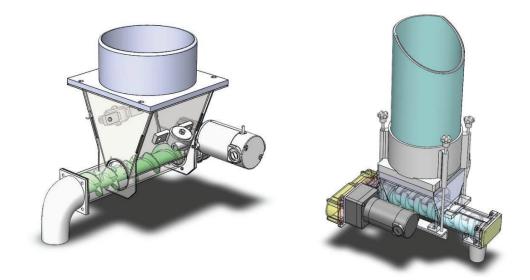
Single-screw extruder design (left) and twin-screw extruder design (right)
